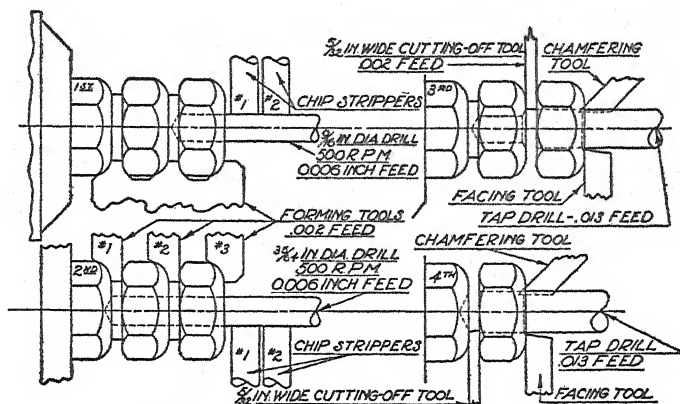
A Setup for Making Disk Wheel Nuts for Automobiles in the Greenlee 4-Spindle Automatic Machine.
